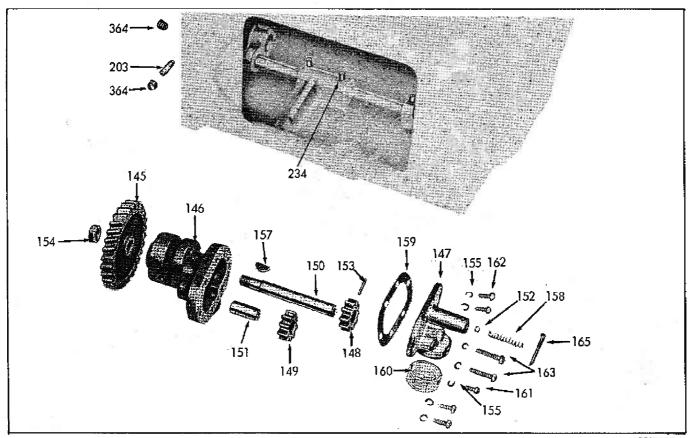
, Ref. No. 144, OIL PUMP ASSEMBLY
